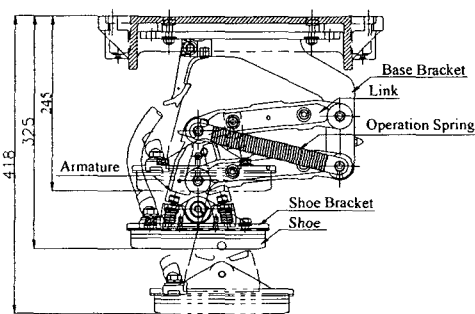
(b) Top view drawing of the power collector and operation range of shoe
